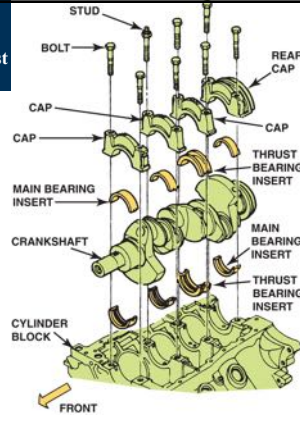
crankshaft rotates on main bearings. Longitudinal (end-to-end) movement is controlled by thrust bearing.
